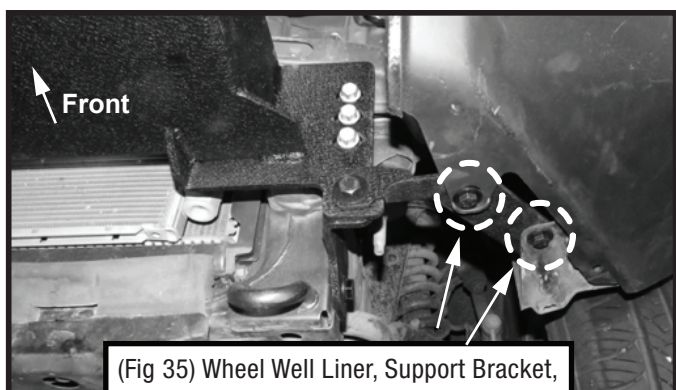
Wheel Well Liner, Support Bracket, and Bumper Cover attached together
